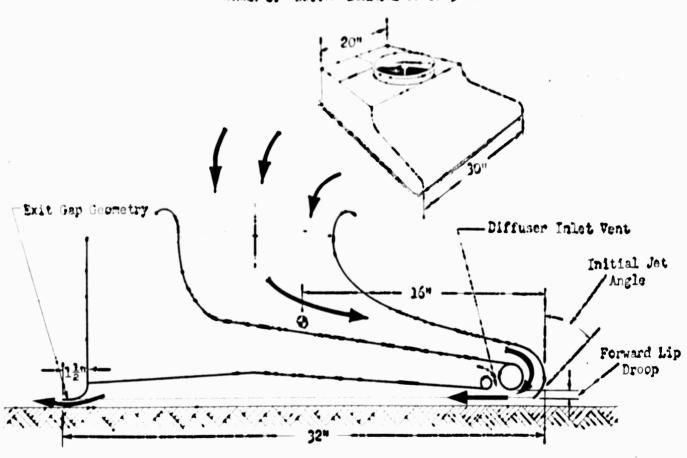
LONGITUDINAL SECTION THROUGH DP-3 GEM
